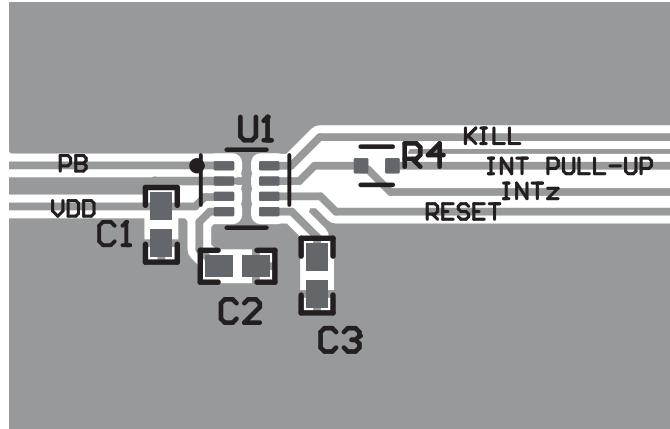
TPS3424: Layout Example (8-Pin DRL Package)
